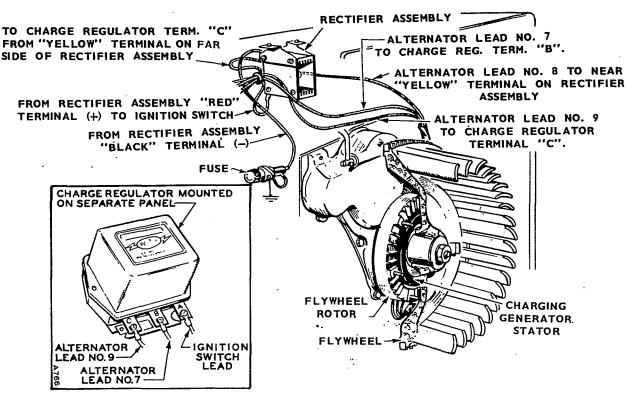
FLYWHEEL ALTERNATOR (PRIOR TO SPEC T)
